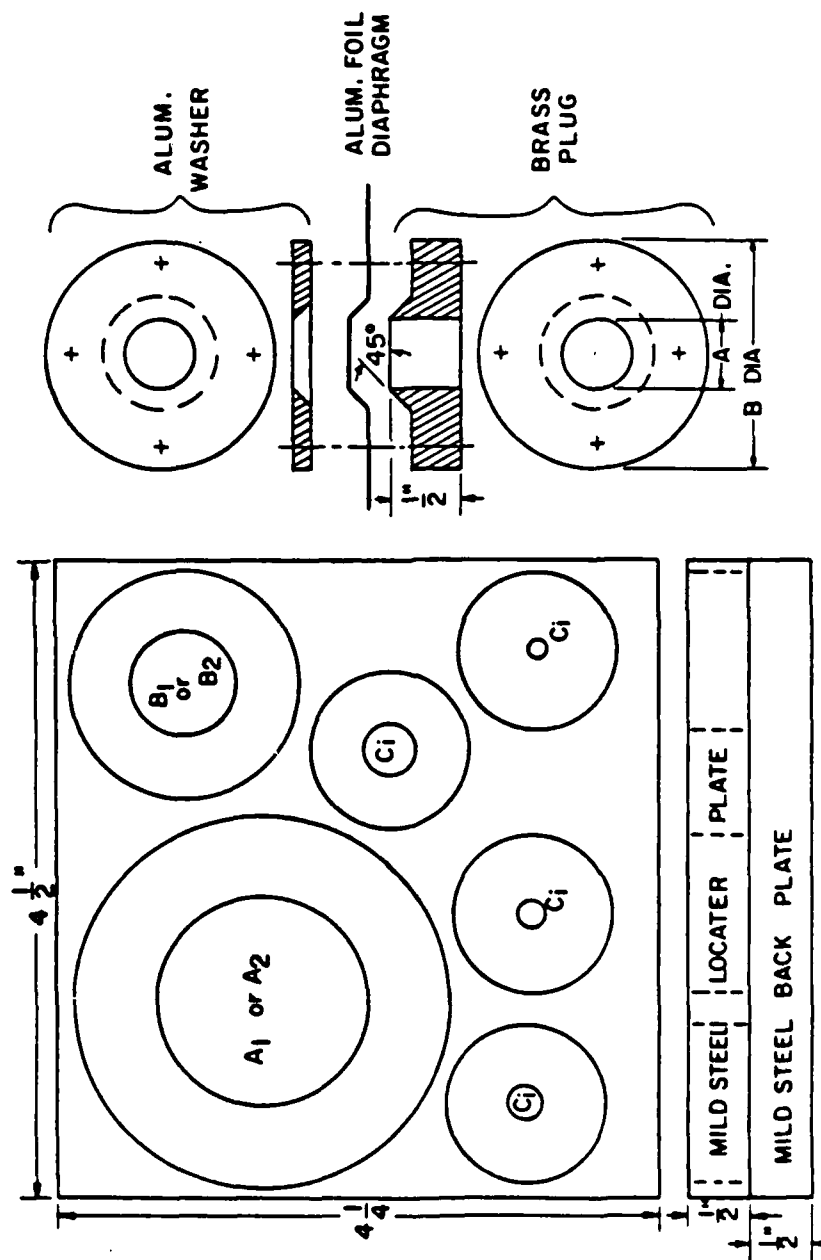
Plan view of the Surface Mounted Discrete Diaphragm Pressure Gage (SMDDPG) and its construction
